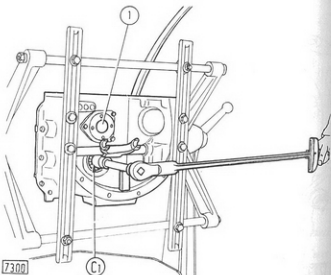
Tightening the Layshaft Retaining Nut using a Torque Spanner
